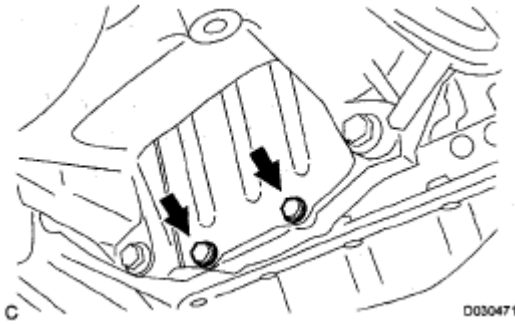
Locating Flywheel Housing Under Cover Bolts
